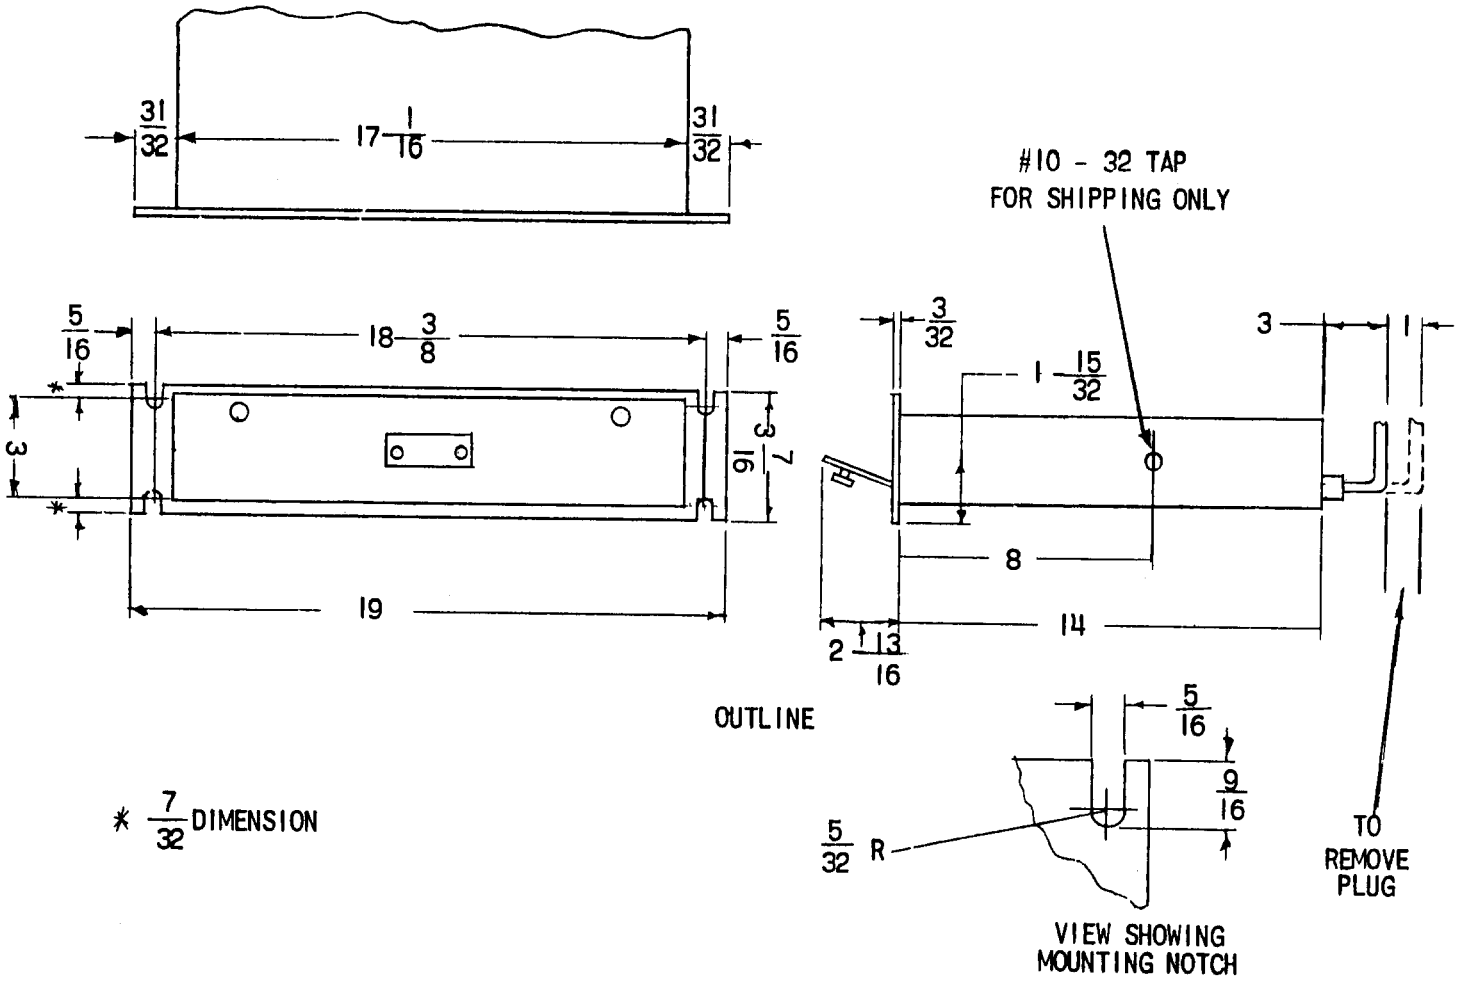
(0227A2036-0) Outline and Mounting Dimensions for the SLC51E Relay
